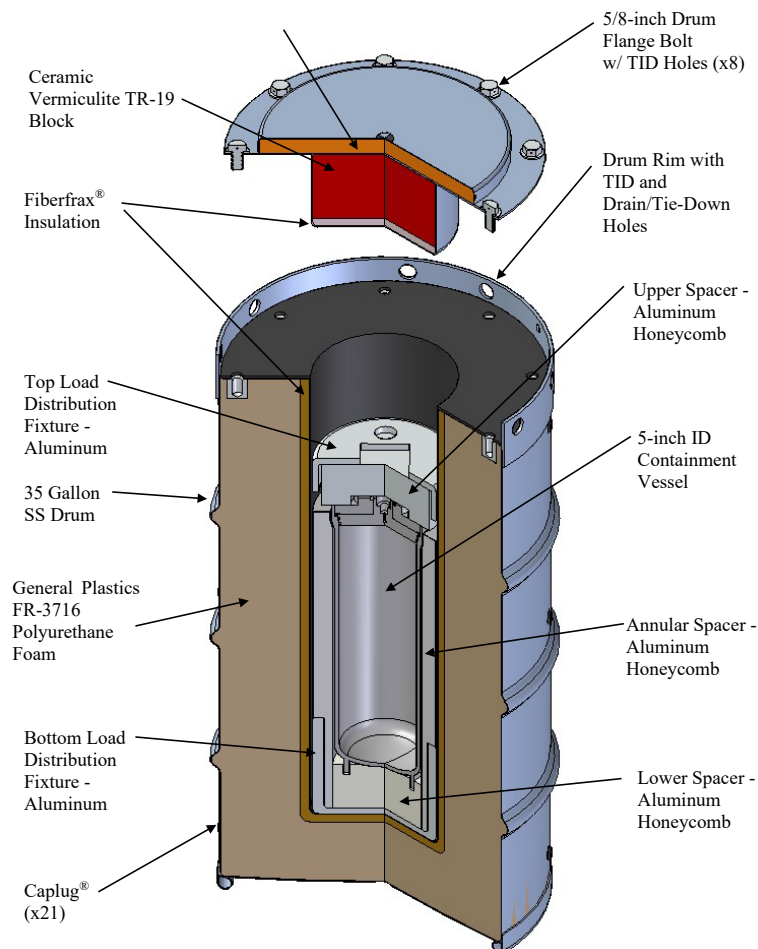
Cut-Away of a Representative SRNL Designed Type B Package
